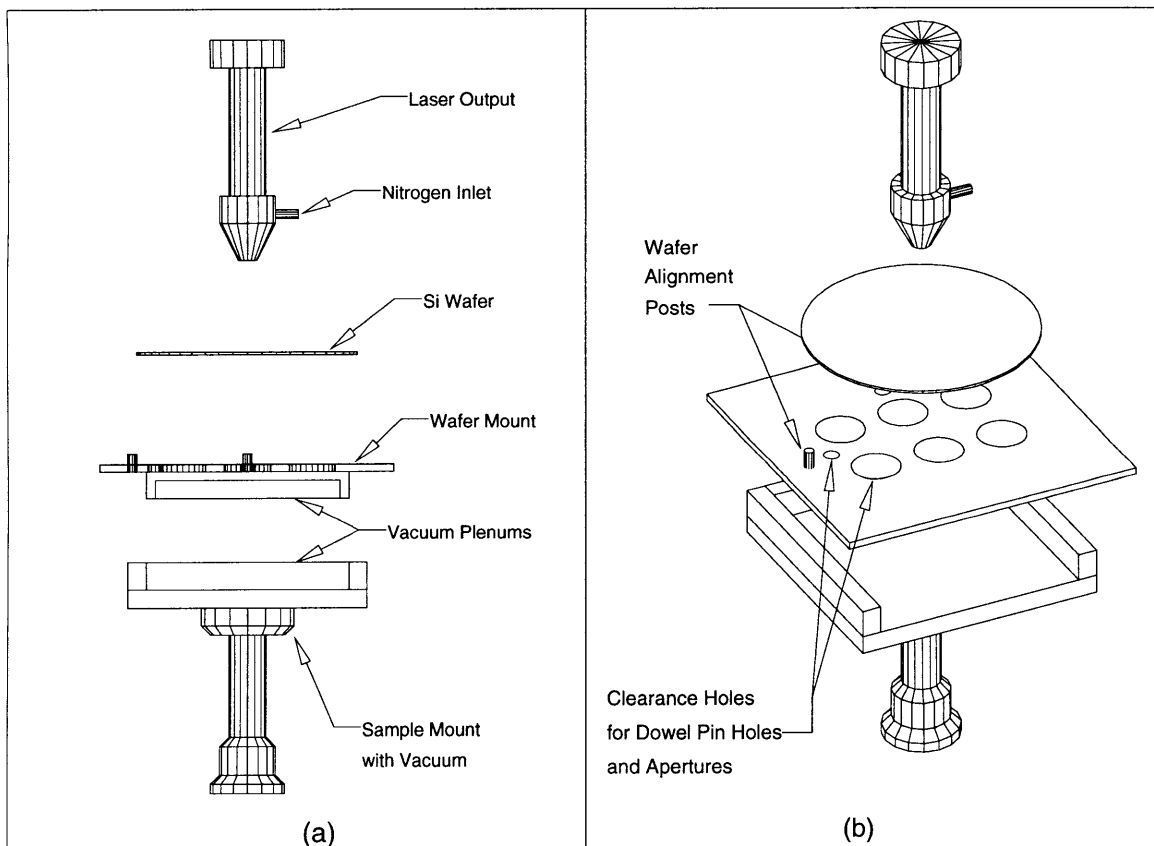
(a) *Side view of laser machining setup*; (b) *Perspective view of laser machining setup
